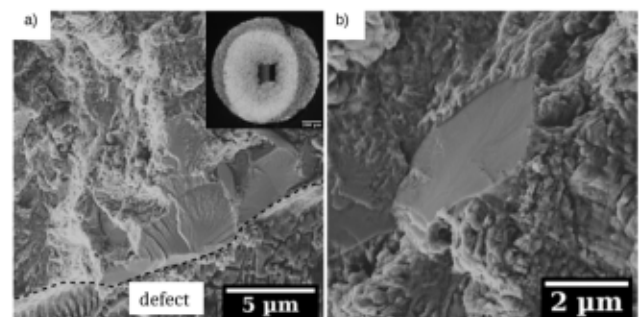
(a) Fracture surface of a sample with an internal defect; the granular region ahead of the facets corresponding to crack initiation is typical of crack propagating in vacuum (b) Magnified view of a facet surrounded by granular region.
